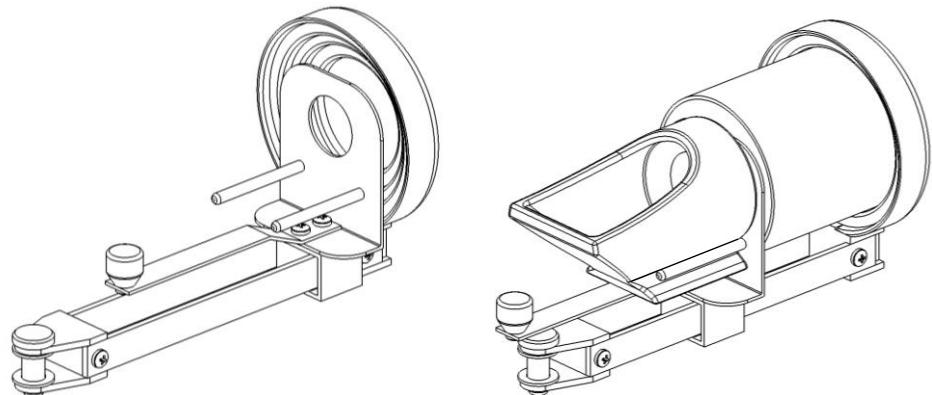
Isometric views of assembled articulated arm, shown with (right) and without (left) crucible and casting flask
